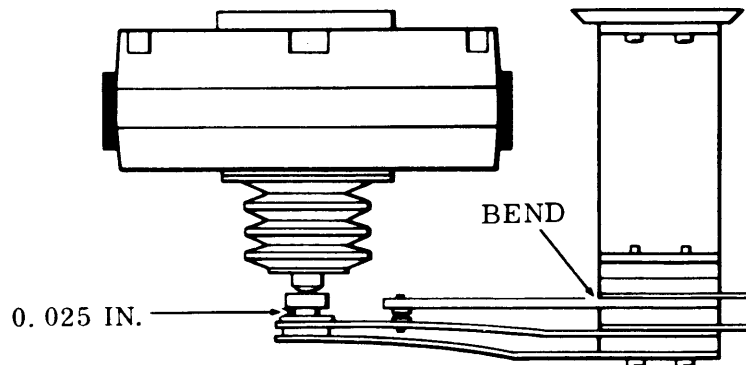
BRAKE PAWL-TO-SPINDLE PULLEY CLEARANCE
